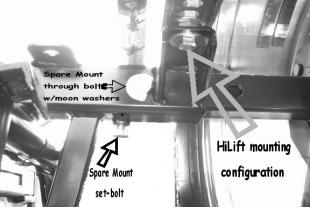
Spare mount - Spare mount set-bolt - Hi-lift jack mounting configuration.
